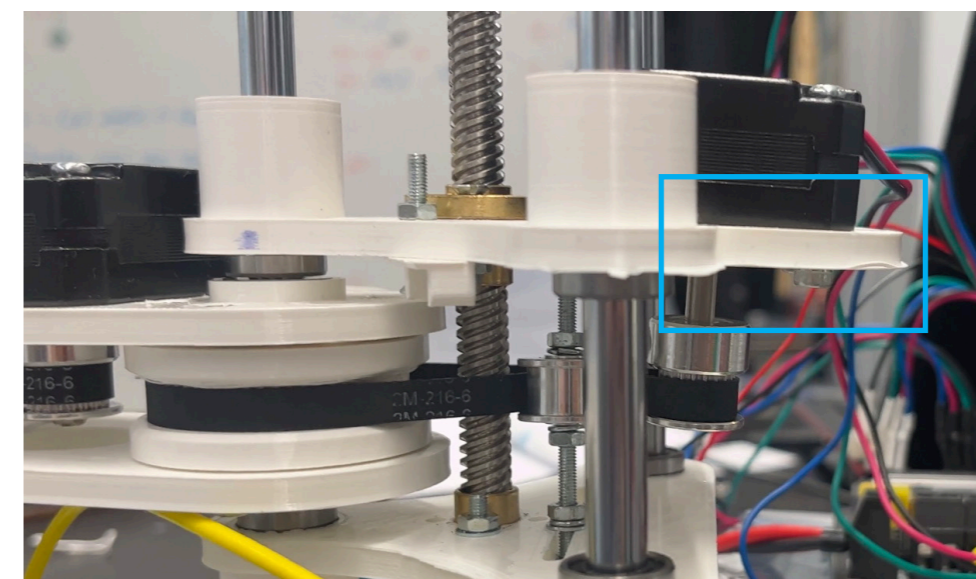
Slight flex of the stepper and its mounting surface due to the belt and pulley system, the pressure is caused by the tensioner bolt.
